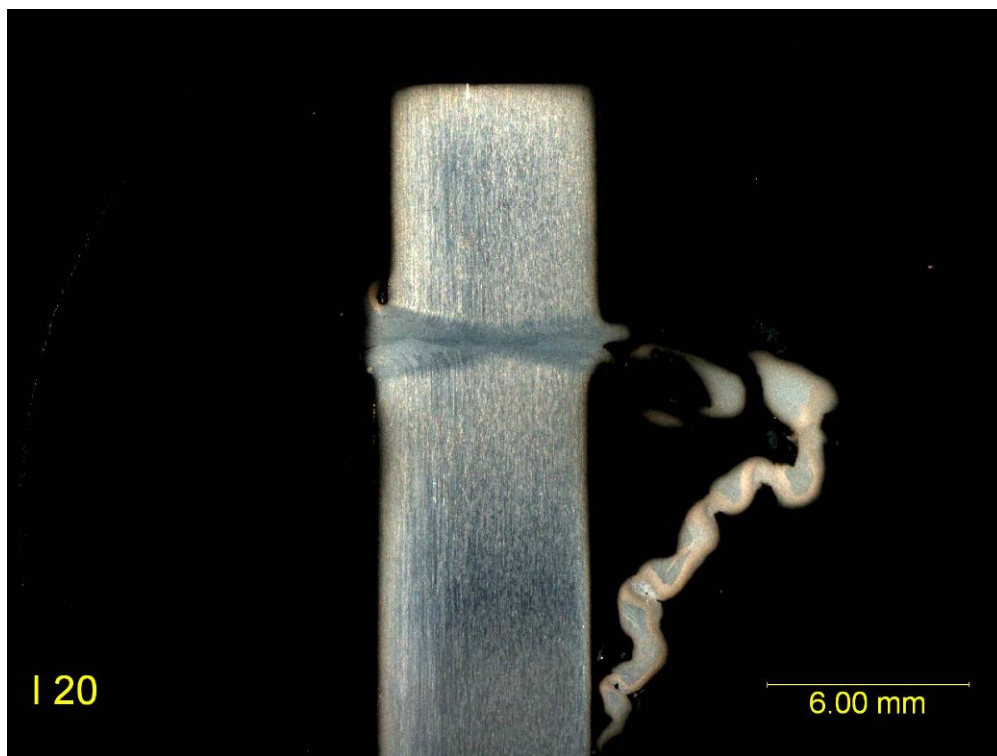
Post Weld Recrystallized Inertia Friction Welded Non Recrystallized MA956 Joint
